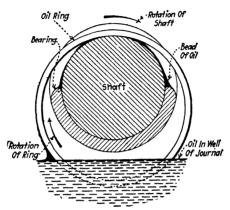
Diagram showing the method whereby a ring-oiled bearing is lubricated.
